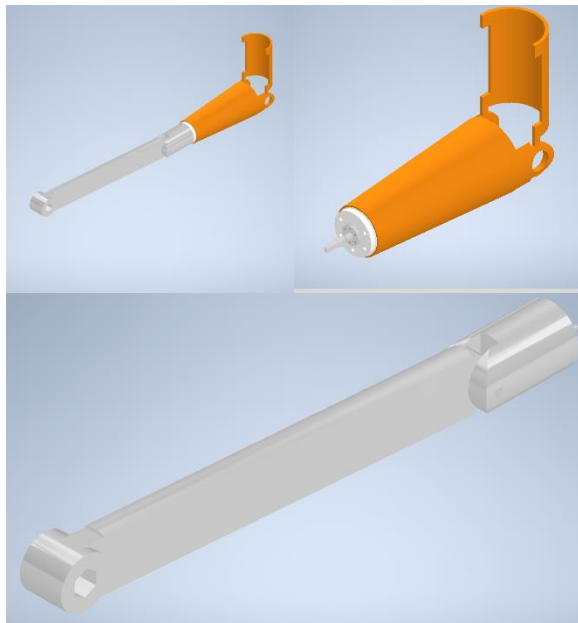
Full assembly of prosthetic arm (left), assembly of extension (right), assembly of sample tool (bottom)
